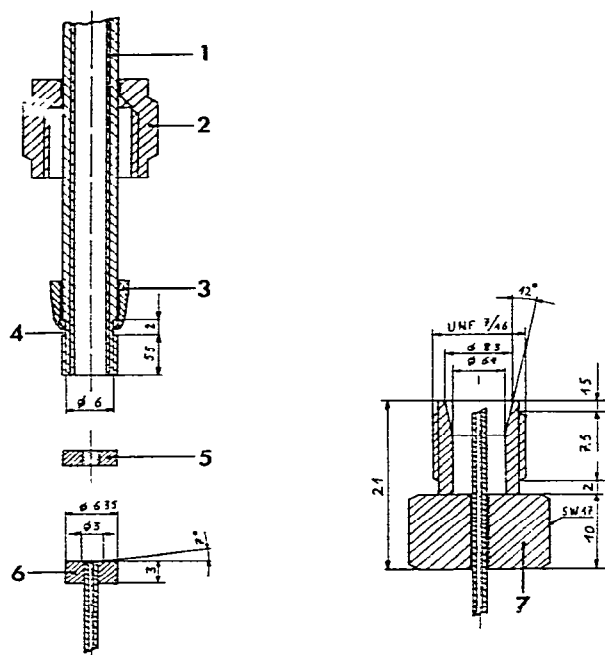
1 = SGE glass-lined metal tubing, 3 or 4 mm I.D.; 2 = 1/4-in. Parker nut; 3 = 1/4-in. Parker ferrule; 4 = 0.2-mm mortice; 5 = Altex AX 250-21 bed support; 6 = end fitting with 16-in. metal tubing, 0.25 mm I.D. (Argon welded seam); 7 = cap with a drilled hole of 1.8 mm I.D.; UNF 7/16 = unified thread of 7/16 in. All other dimensions are given in mm.
